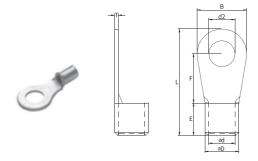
Appearance and dimensions of the circular naked lugs (TO Type)
